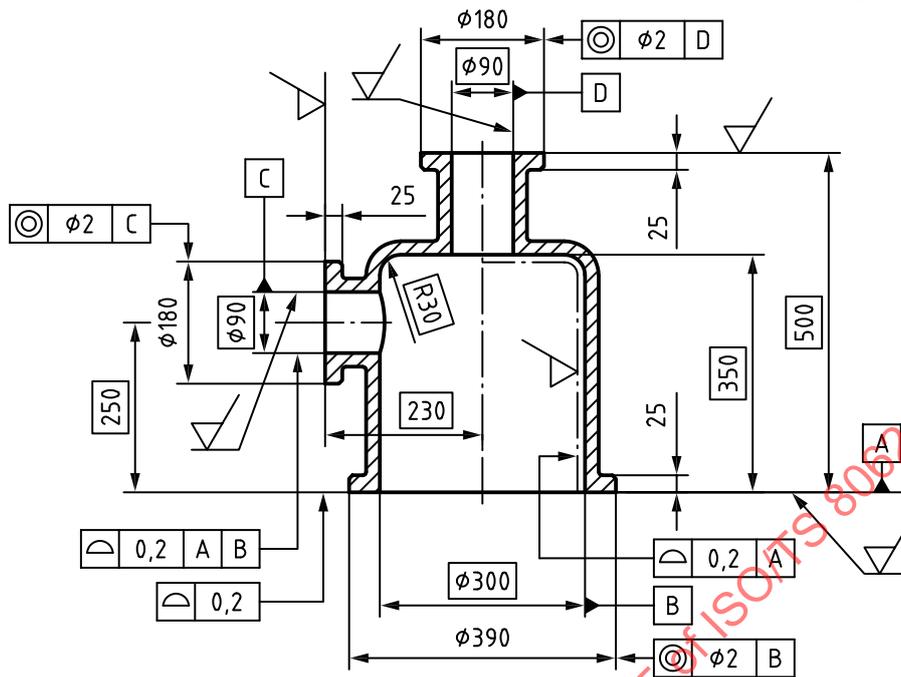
Final moulded part, particular general tolerances and individual tolerances
